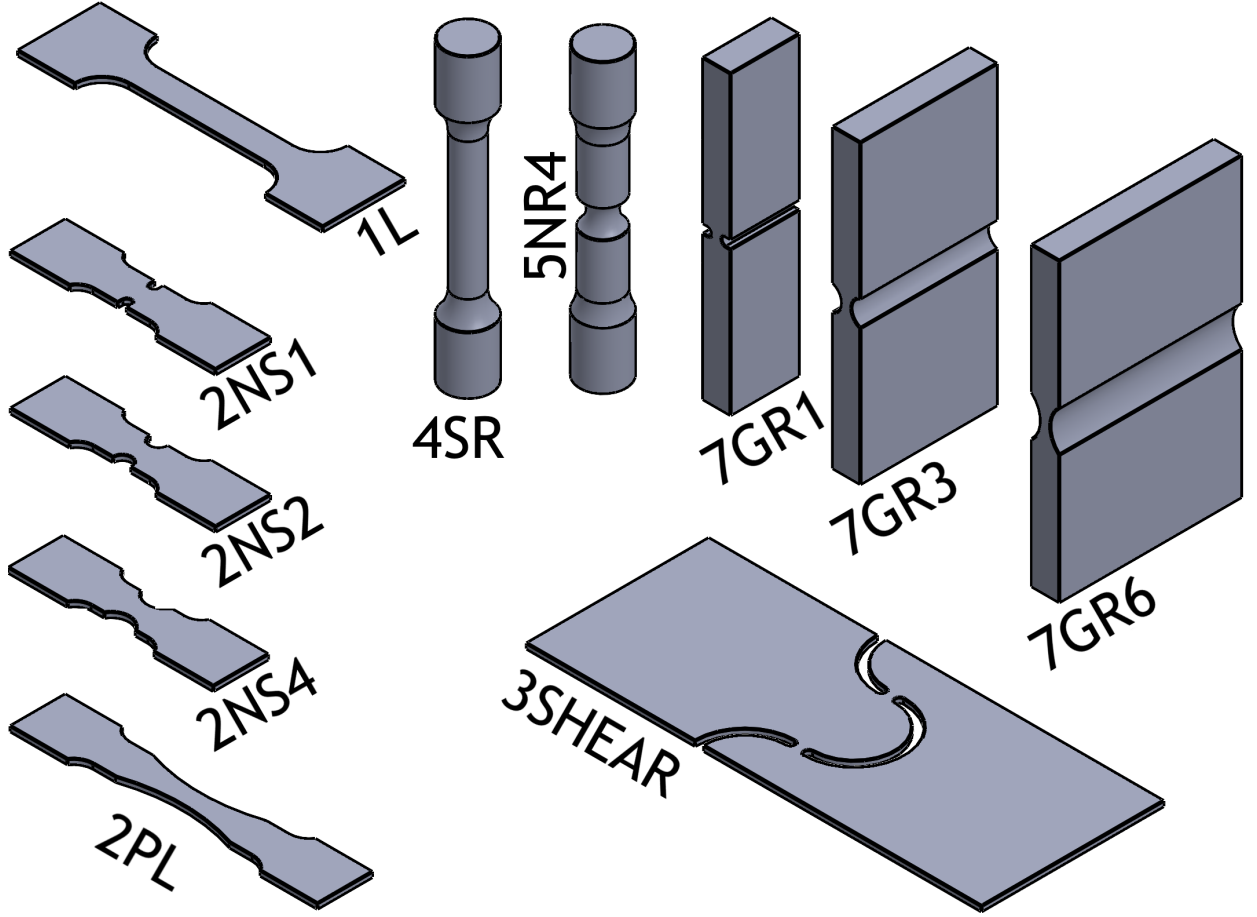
Drawings of the plate (1L, 2PL, 2NS, 3SHEAR), axisymmetric (4SR, 5NR), and grooved (7GR) specimens.
